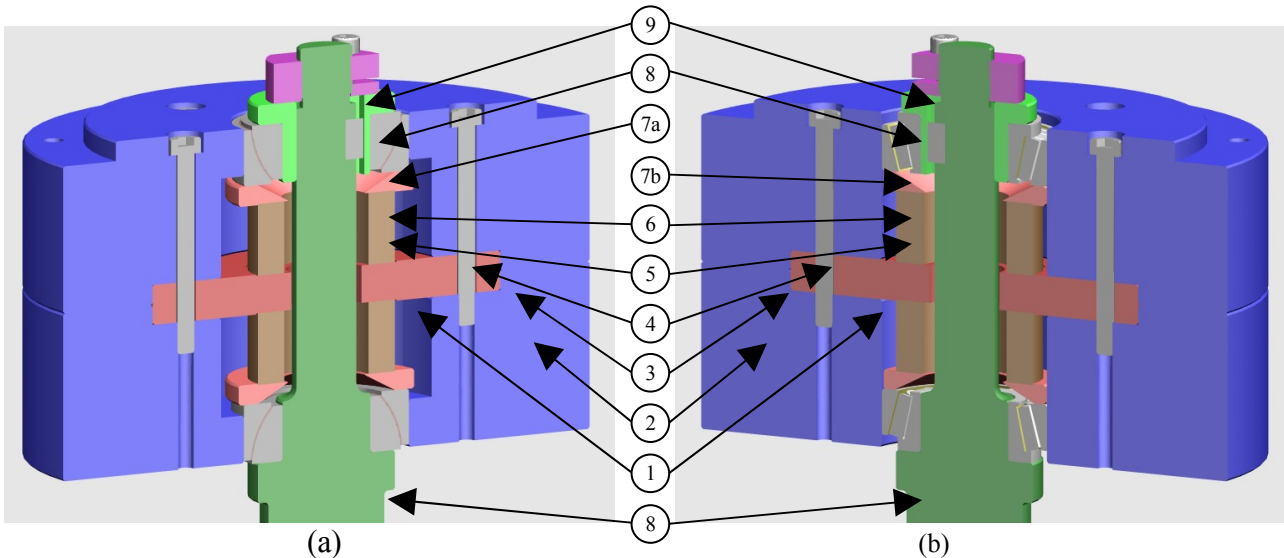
Laboratory joint prototypes with integrated plain (a) and rolling (b) bearings
